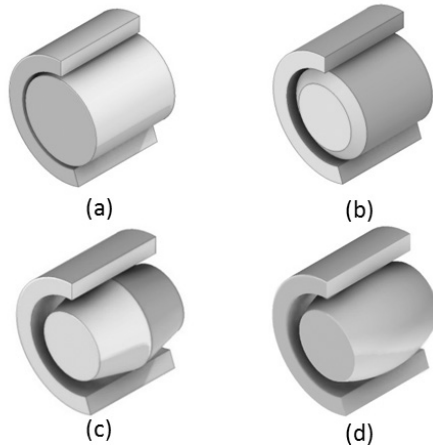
Pin joint concept designs considered for non-assembly fabrication (a) traditional pin (b) with chamfered ends (c) Double cone (d) Drum-shaped[7].
